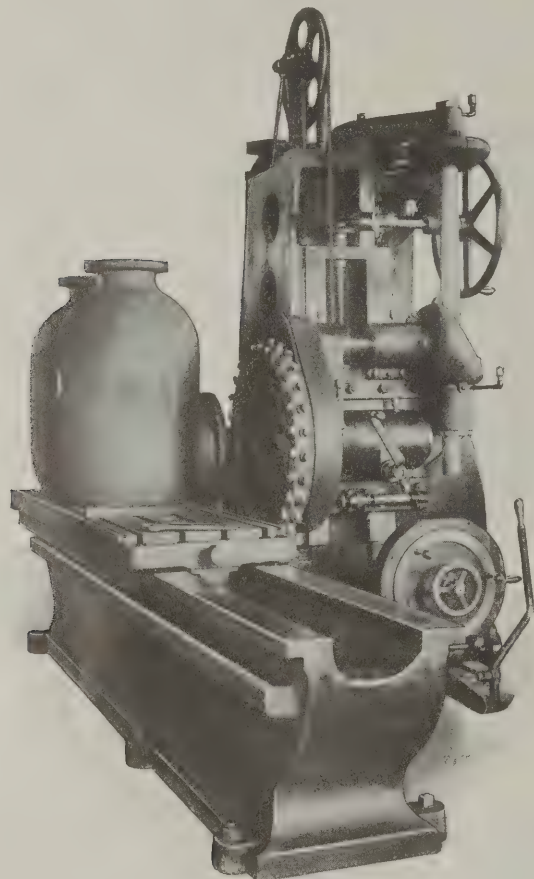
Ingersoll Machine Milling Flanges of Steam Pump Air Chambers
